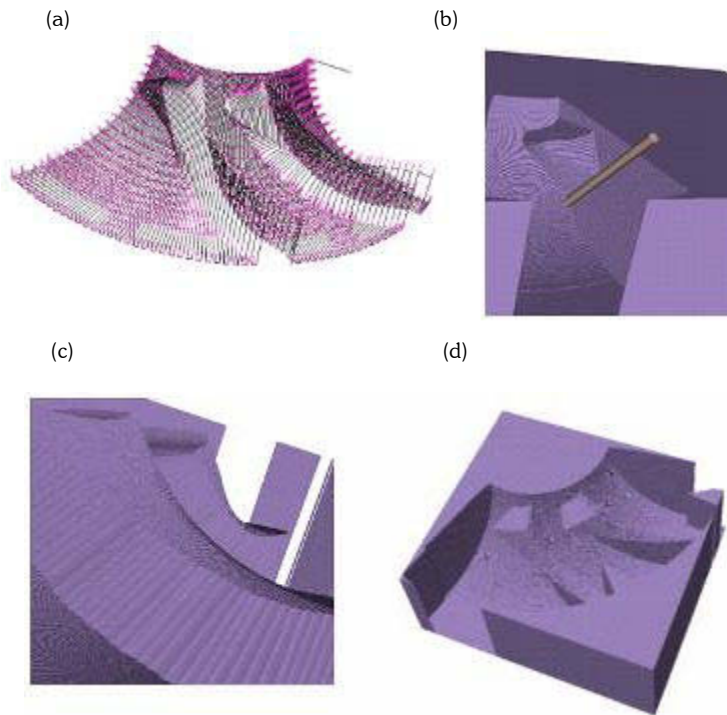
Example of impeller in five-axis simulation. (a) Tool paths. (b)(c) In-process workpiece with a cutter. (d) Finished part.
